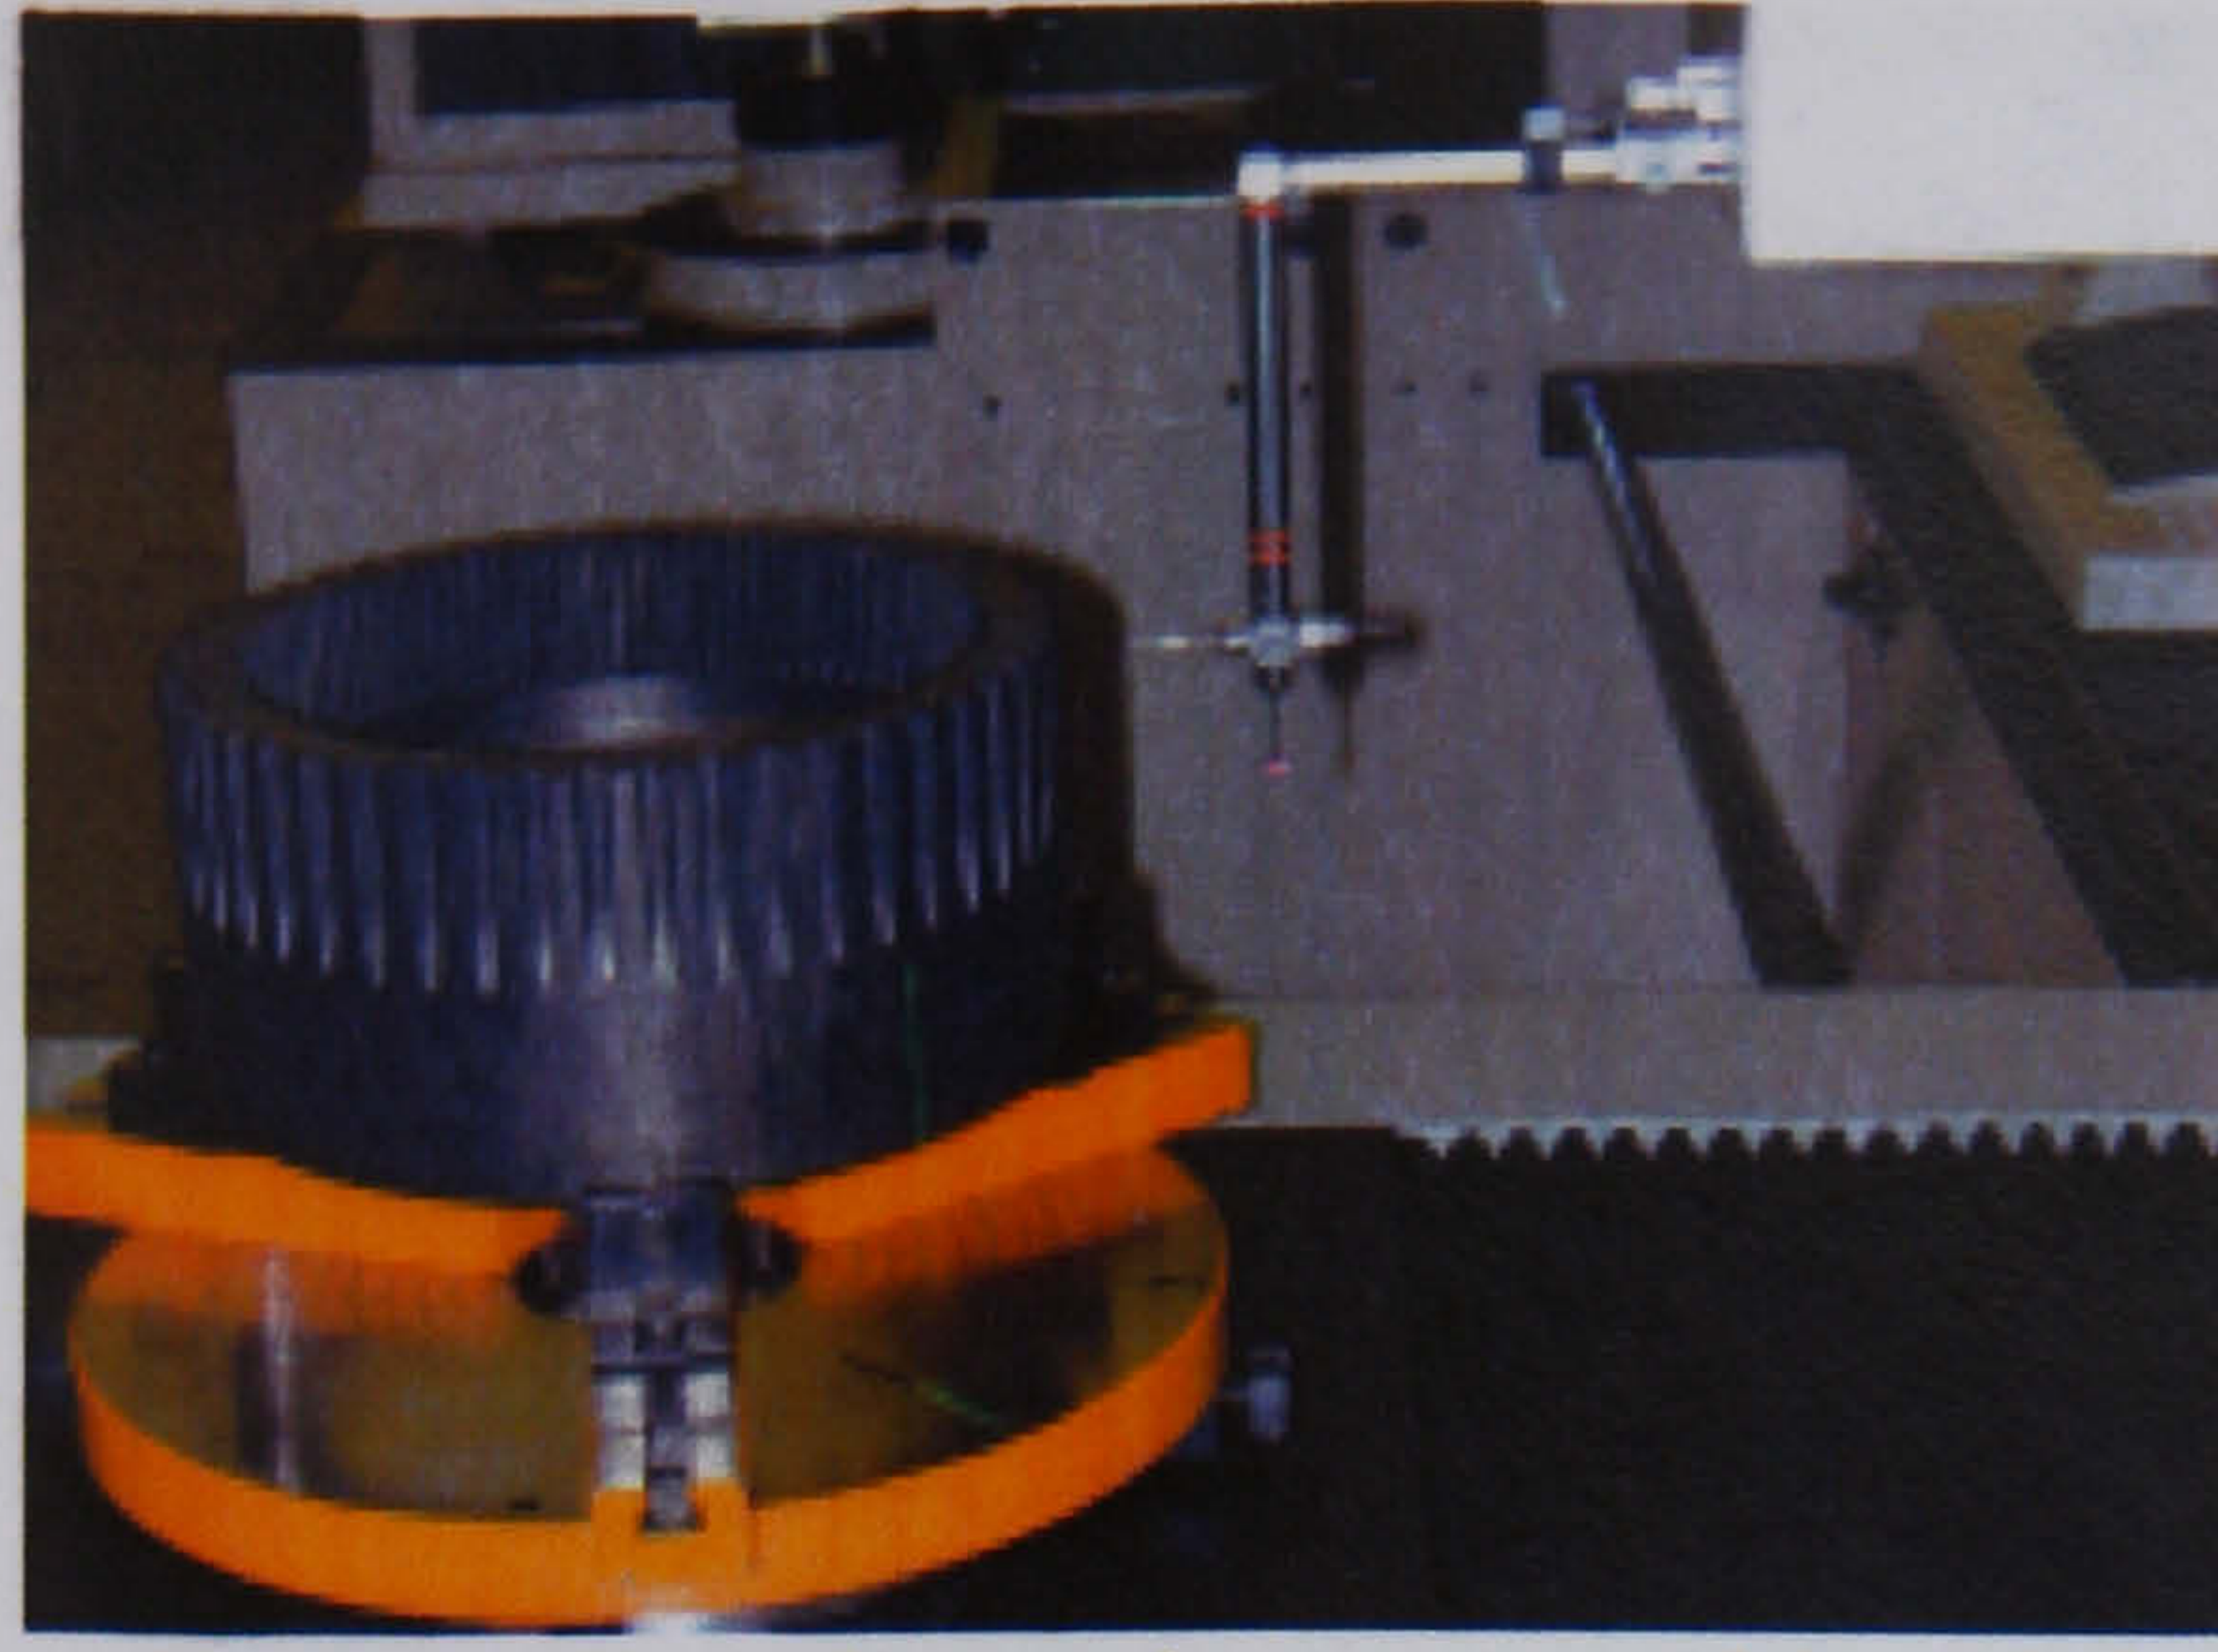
Mounting the gear directly on the rotary table minimises error sources but is only suitable for relatively short gears due excessive elastic deflection ($L/b < 3$).
